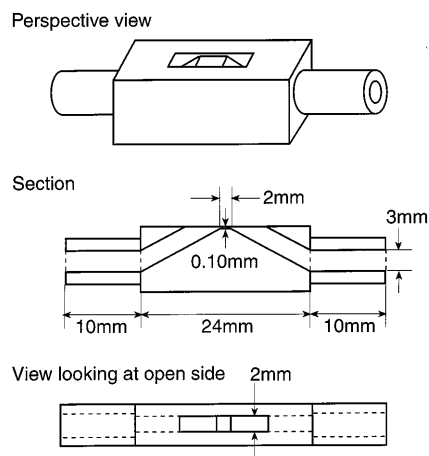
High-speed channel flow cell showing a perspective view and the principal dimensions
